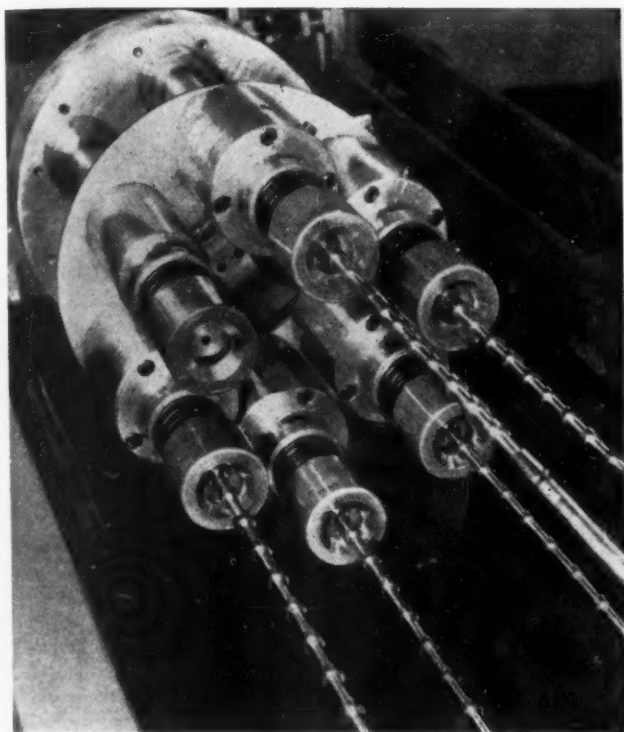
LAPOINTE MACHINE, SHOWING BARREL-HOLDING FIXTURE AND INDEXING HEAD
